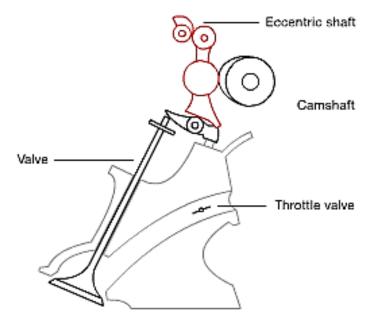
Two-Dimensional View of a Valvetronic System for Intake Valves.
